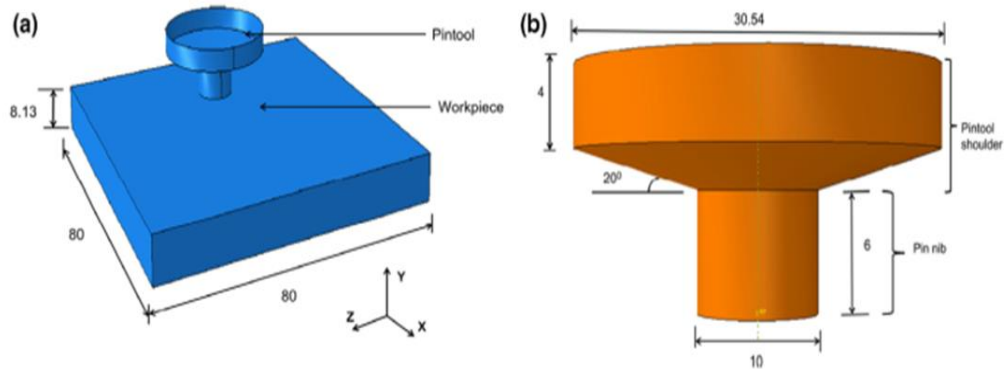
3D model of (a) workpiece, (b) tool pin dimensions [69]
